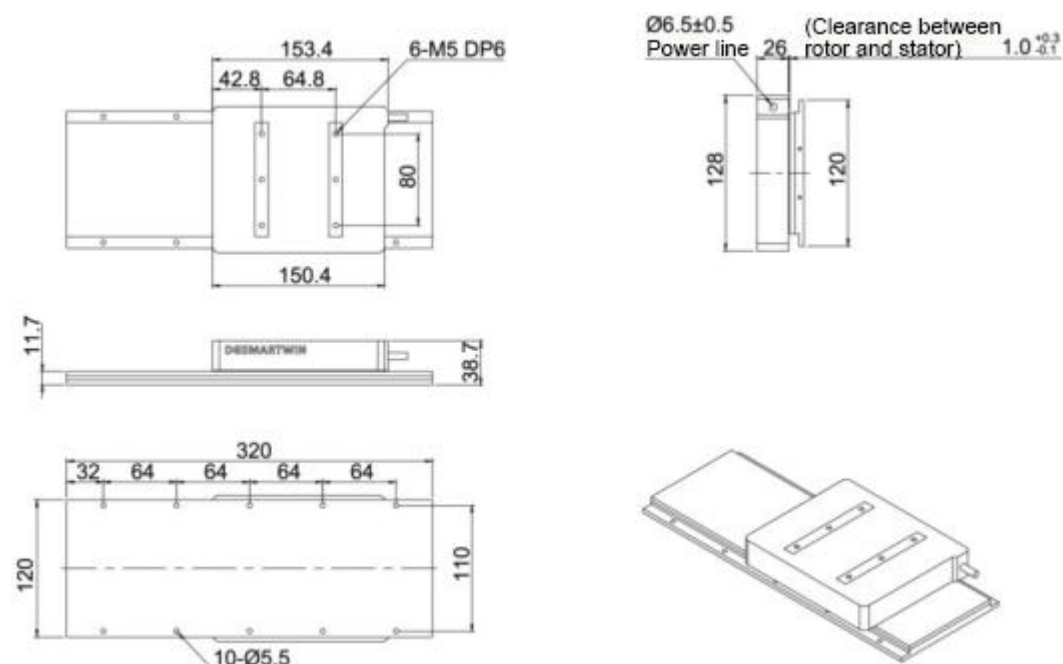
Dimensional drawing of WZCR-AZ120C1-□ motor
